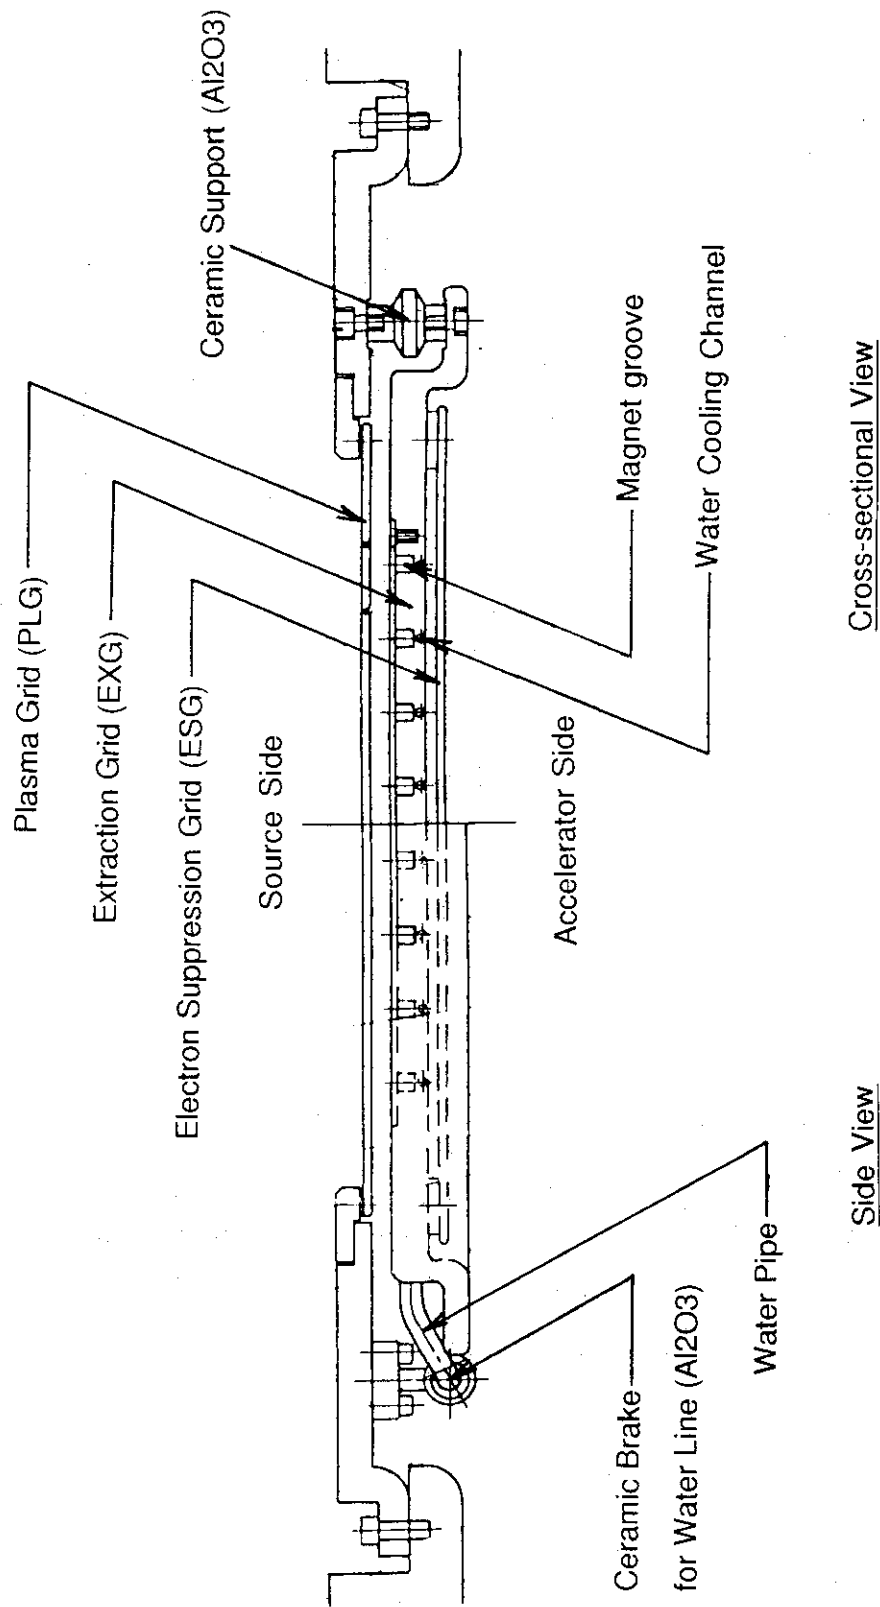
A side and cross-sectional view of the extractor assembly.
